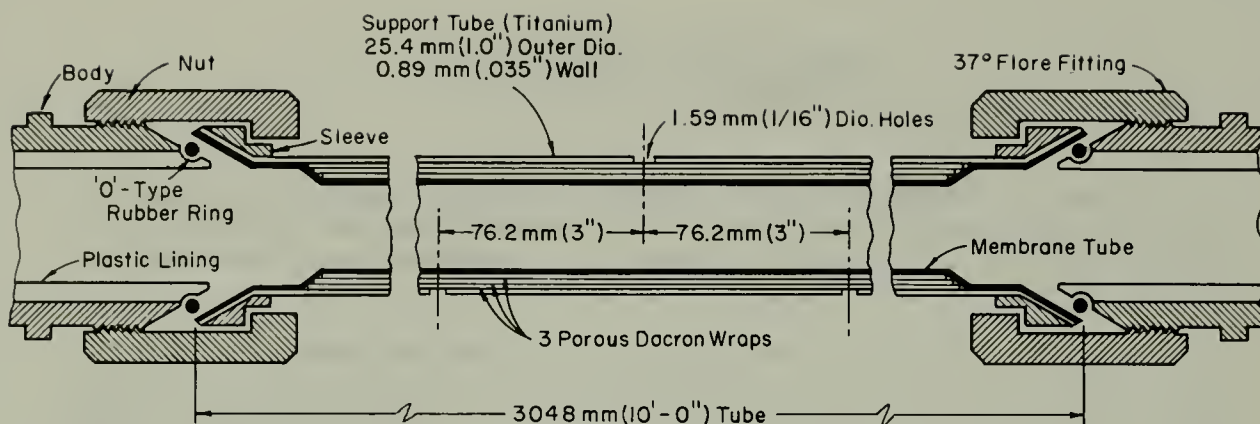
Typical Tubular Assembly – 500-Tube (UCLA) RO Unit
